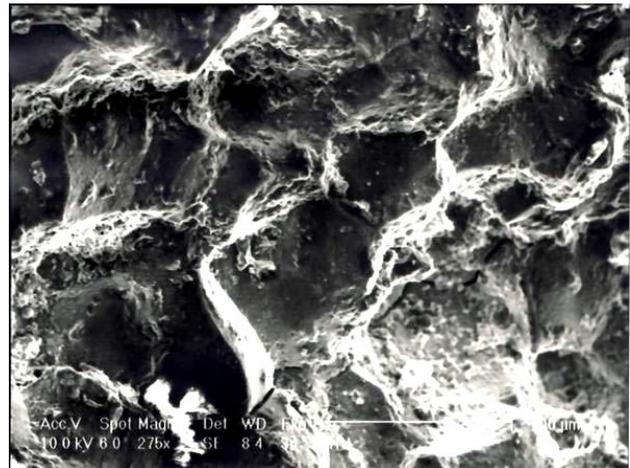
Intergranular Fracture Morphology (There is a crack on fracture surface)
